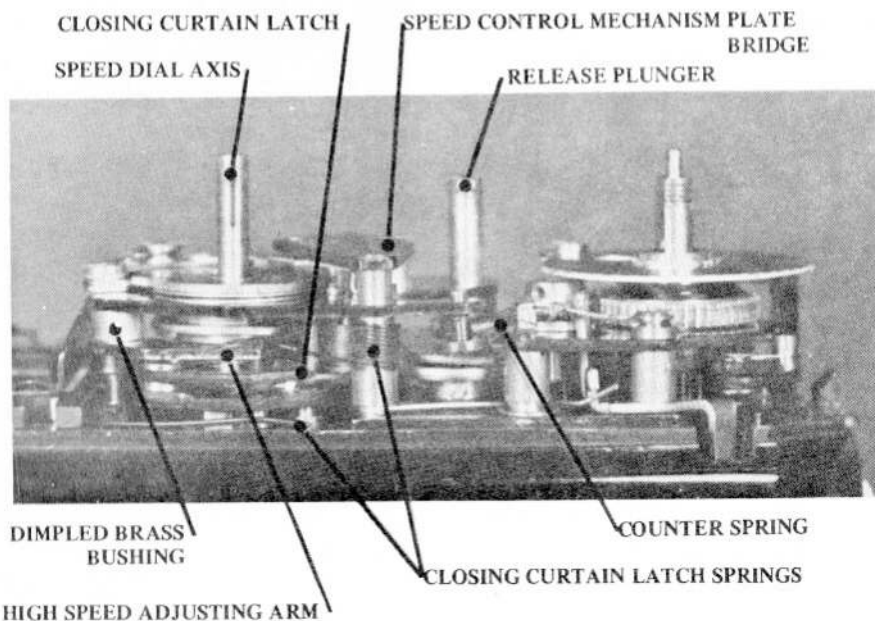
REAR RIGHT-HAND SIDE OF CAMERA BODY
